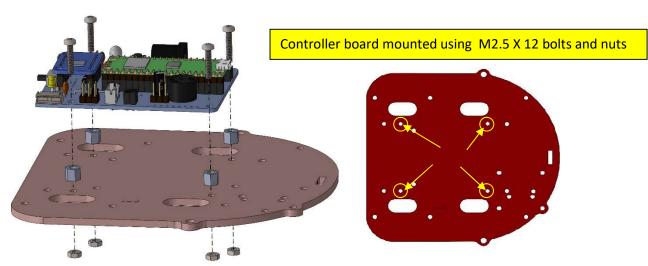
controller attaches to top plate using 5mm high M2.5 spacers
